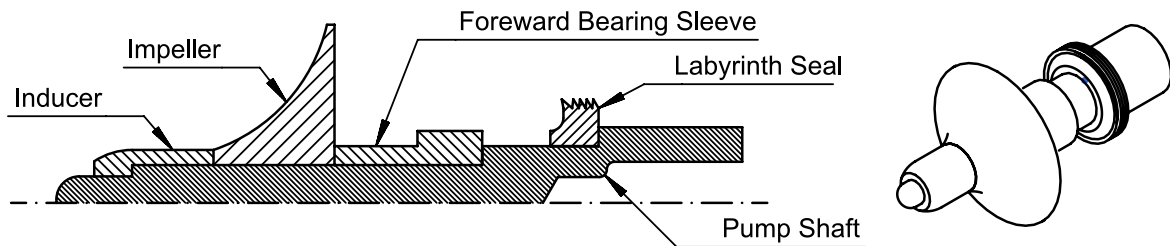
Components of the shaft assembly for radial load assumptions
